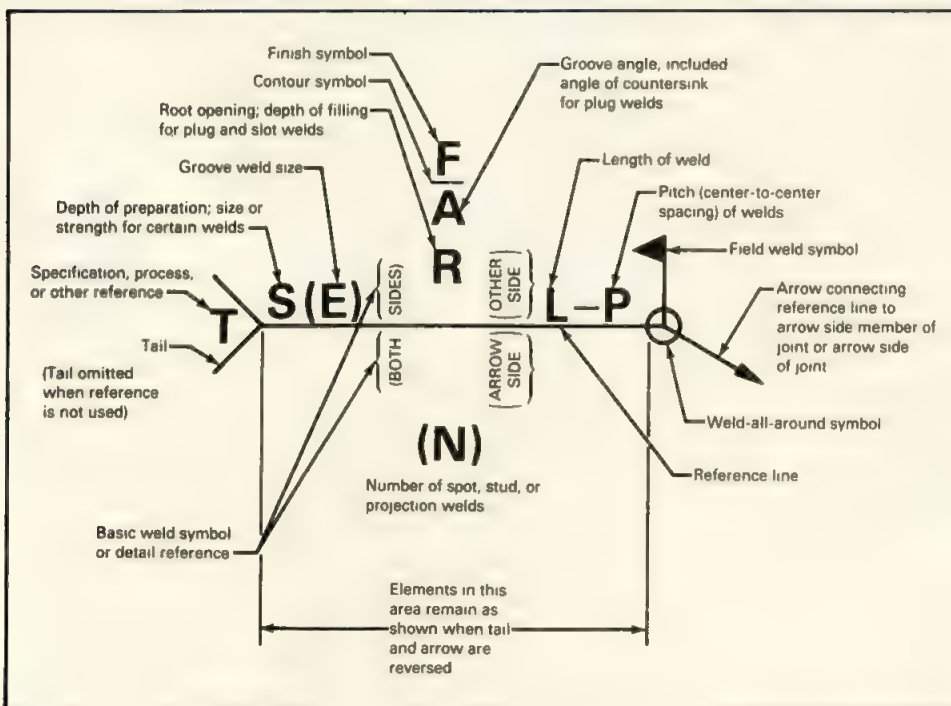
Standard location of elements of a welding symbol.
